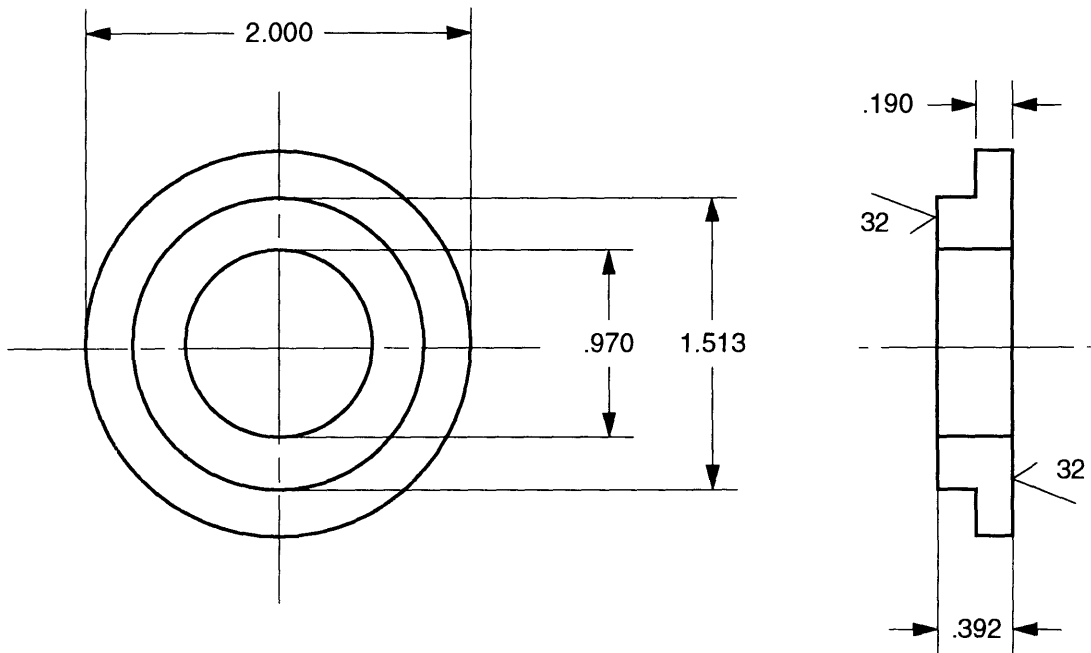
Gear Pump Outlet Flange/Crosshead Adapter Disk.
